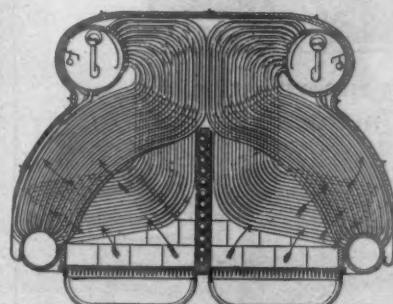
THE MOSHER DOUBLE BOILER, 1890.
